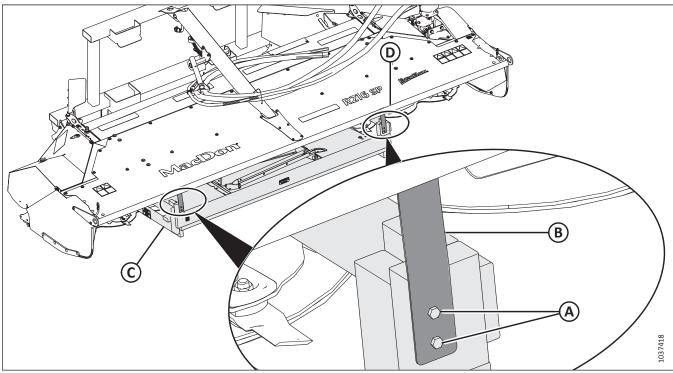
Standard Header with Forming Shield Crate - View from Front
